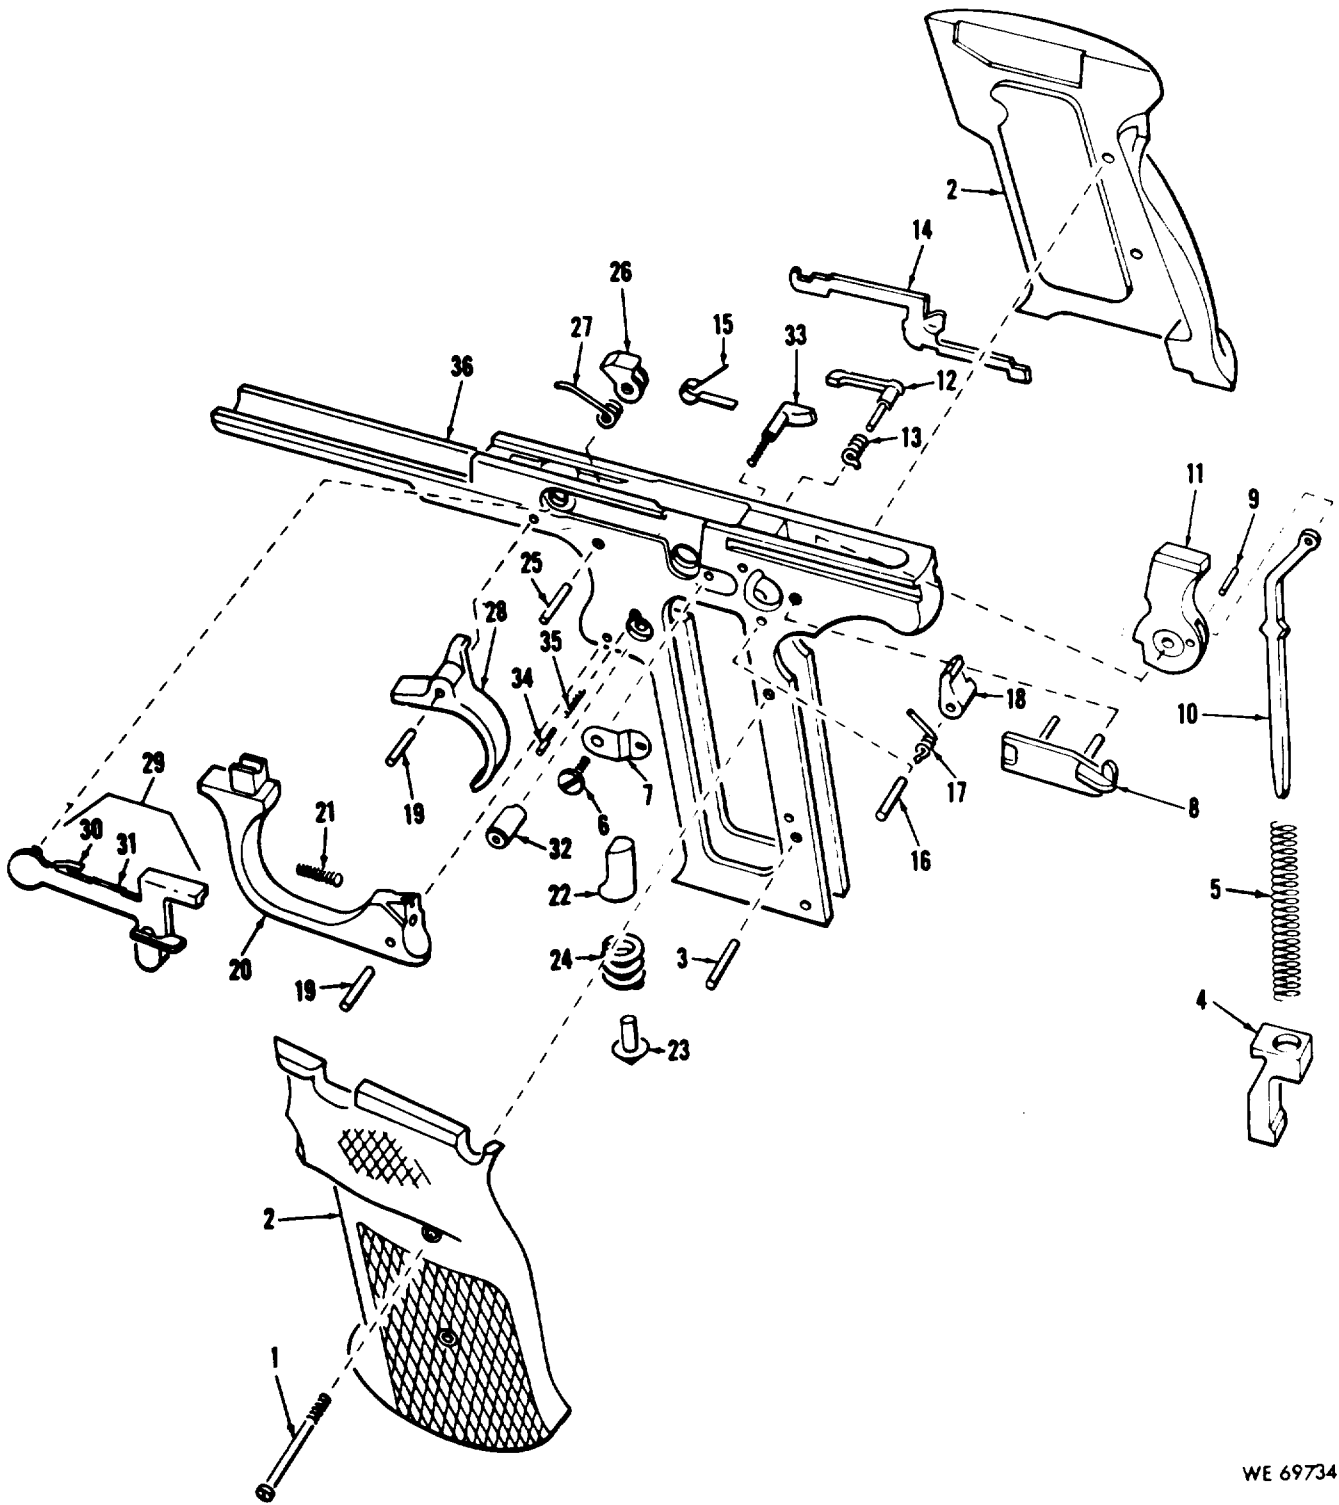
Receiver group for Model 46 Smith and Wesson cal. .22 automatic pistol-exploded view.
